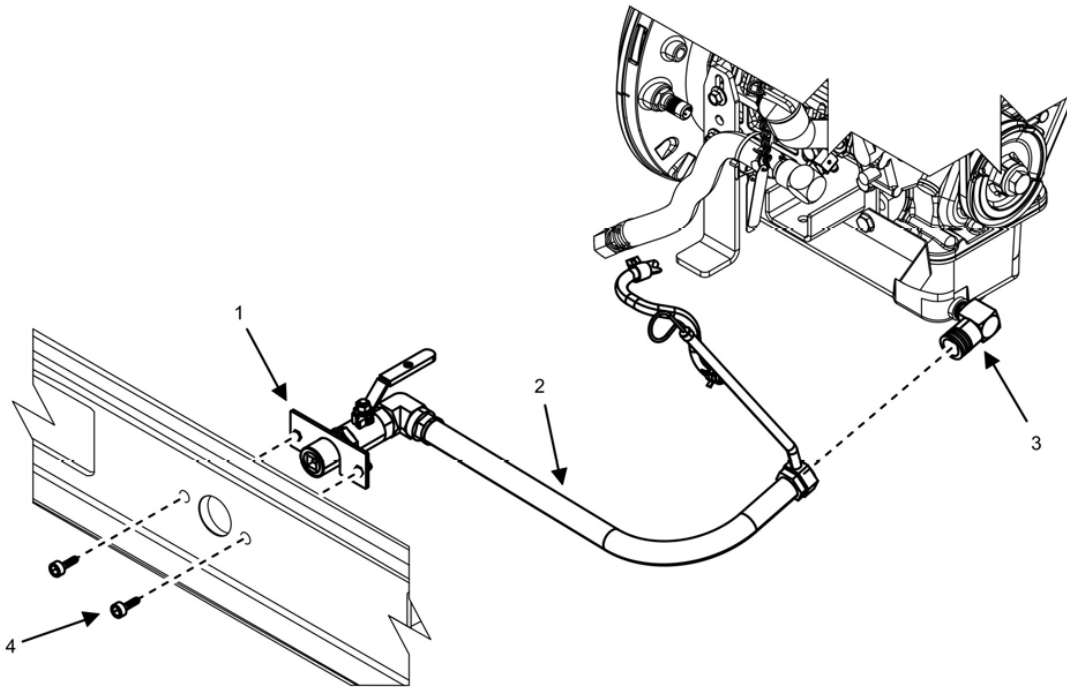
Engine Oil Drain Hose Assembly - Removal.
